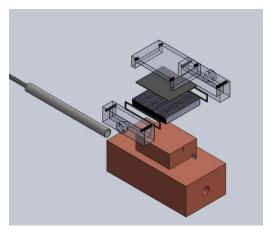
Exploded view of the modeled 'CPU' heater block, cold plate, and modular housing unit design. A thermocouple is placed in the heater block 5mm from the top surface. Pipes are inserted in the housing unit and a gasket and two O-rings prevent water bypass and leakage.
